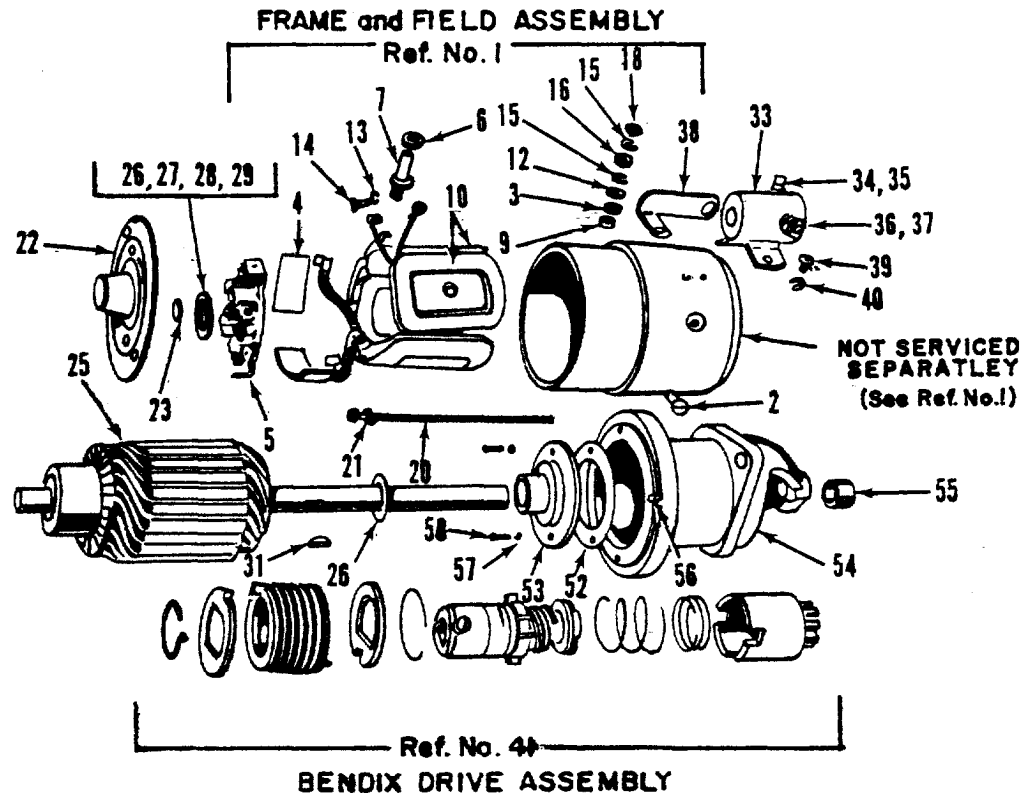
YA-42 (12 Volt) STARTING MOTOR
